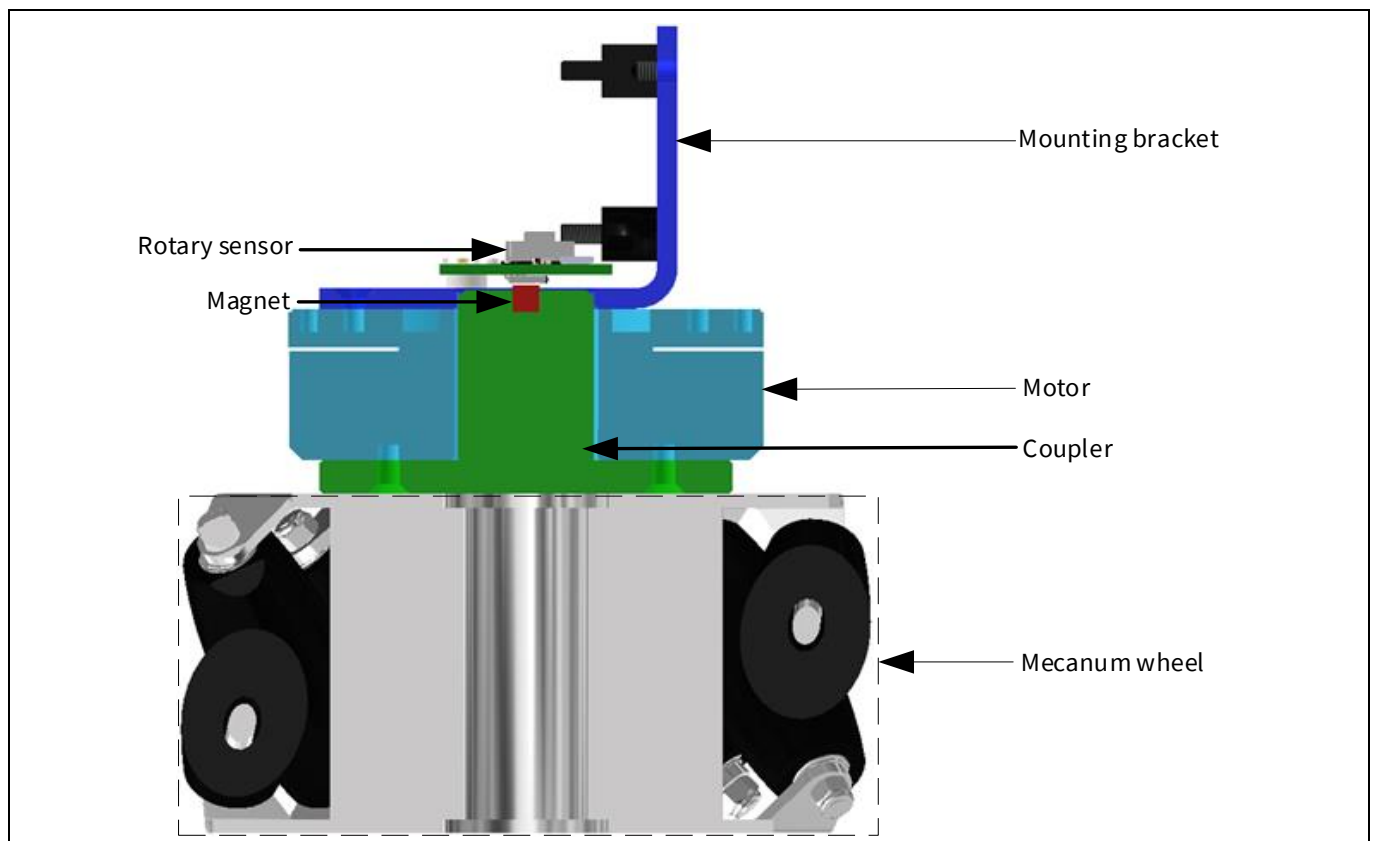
Cross-section through a wheel as used in the IMR demonstrator
